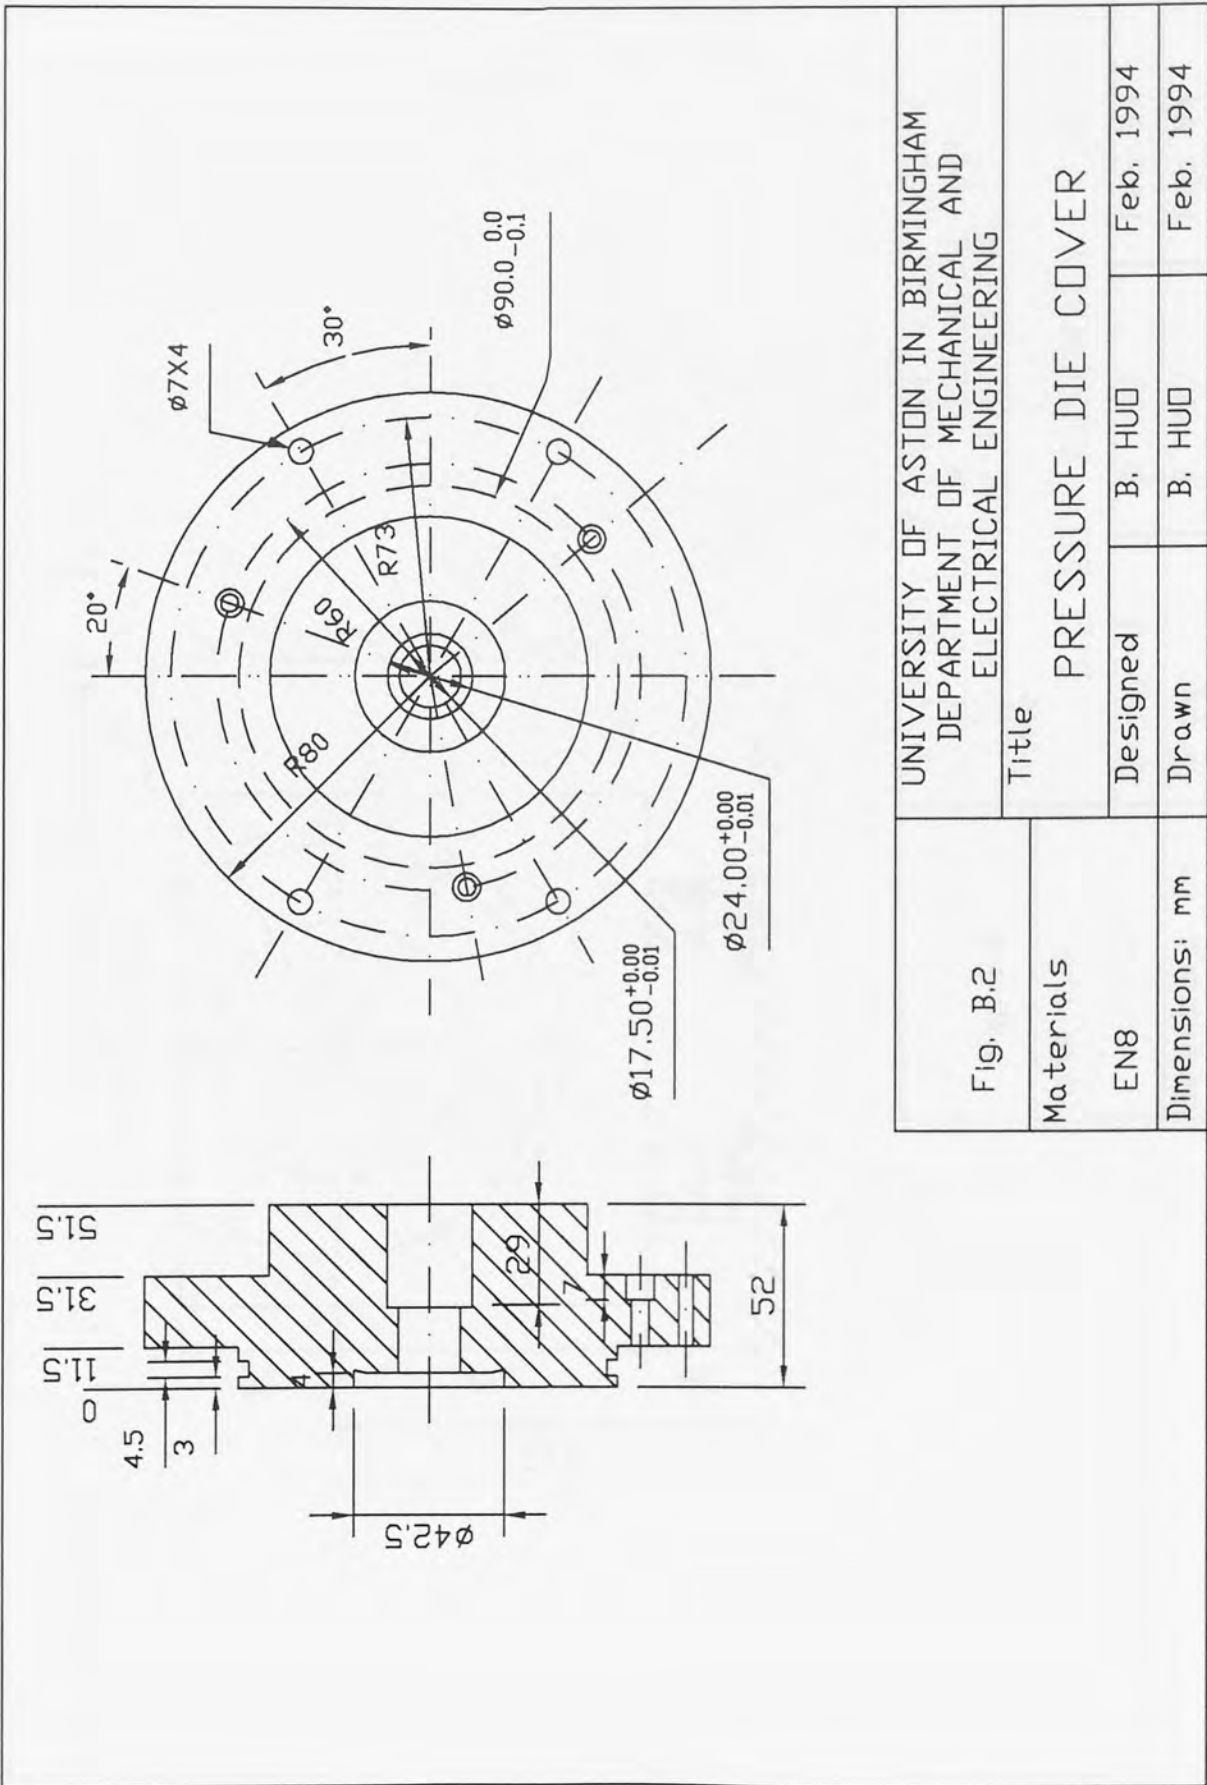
UNIVERSITY OF ASTON IN BIRMINGHAM DEPARTMENT OF MECHANICAL AND ELECTRICAL ENGINEERING
